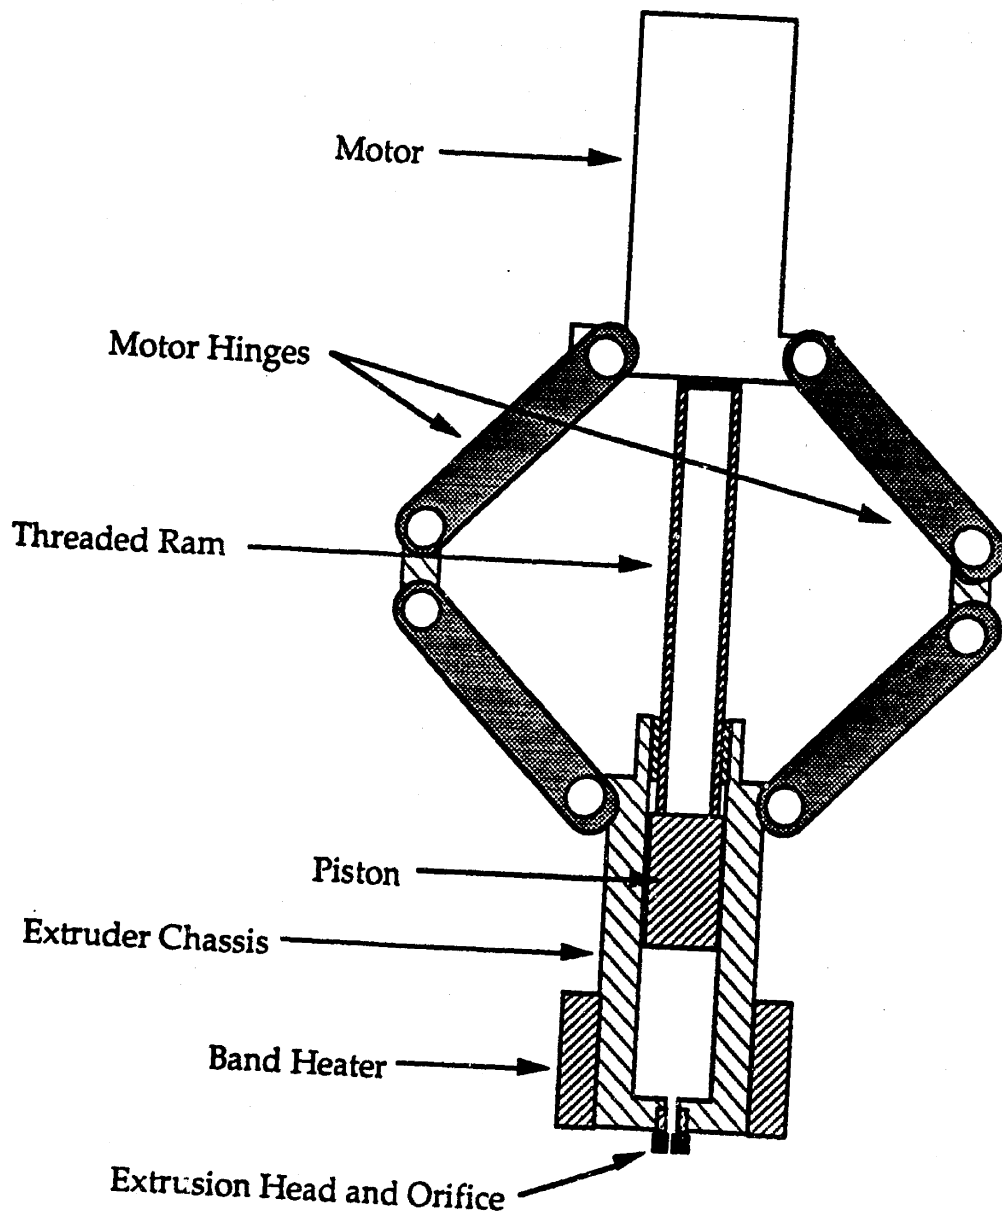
Improved extrusion apparatus with single band heater, piston without O-ring, and integral extrusion head/orifice.
